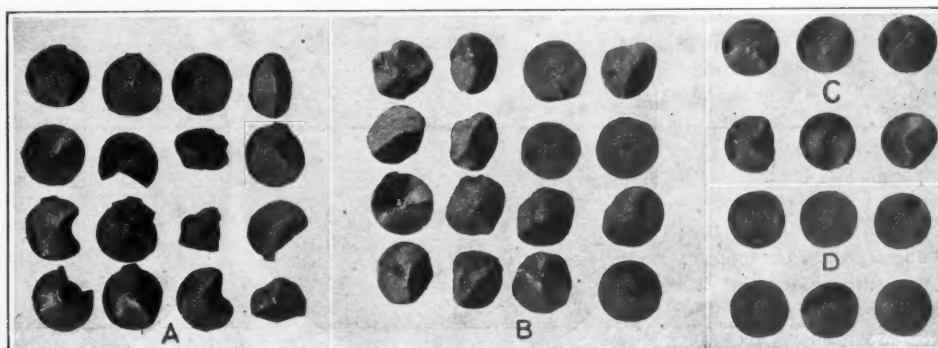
(A) Fractures of Header Cracked Balls that broke when re-heat-treated in Laboratory at 1500 Degrees F.; (B) Fractures of Perfect Balls that did not break when re-heat-treated at 1600 Degrees F.; (C) Fractures of Balls with Slight Cracks which broke when re-heat-treated at 1500 Degrees F.; (D) Fractures of Perfect Balls that did not break when re-heat-treated at 1600 Degrees F.
